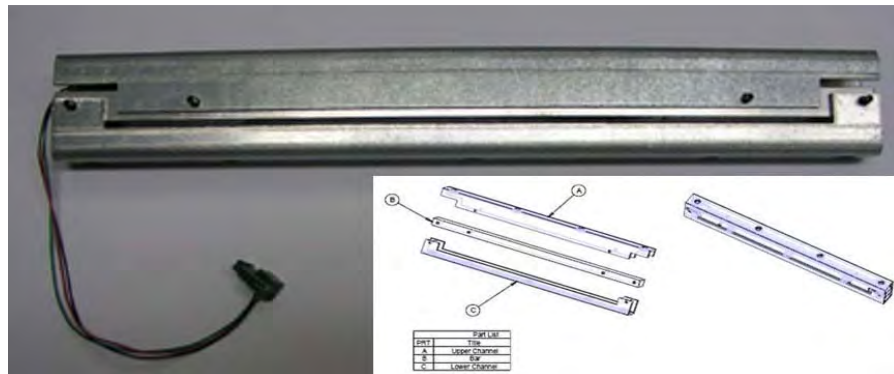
Image of the load cell and an exploded view of the load cell showing the upper and lower channel as well as the bar where the strain gages will be attached.
